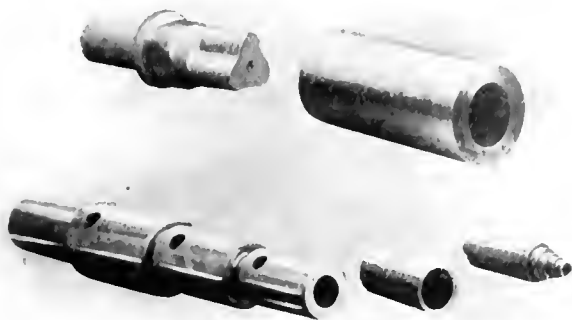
Samples of Turning and Boring produced by the Attachment.
